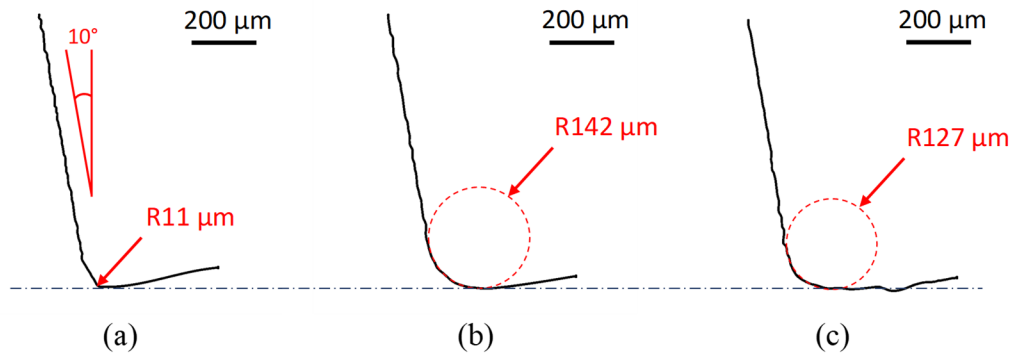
Cutting edge geometry: (a) Fresh tool;
